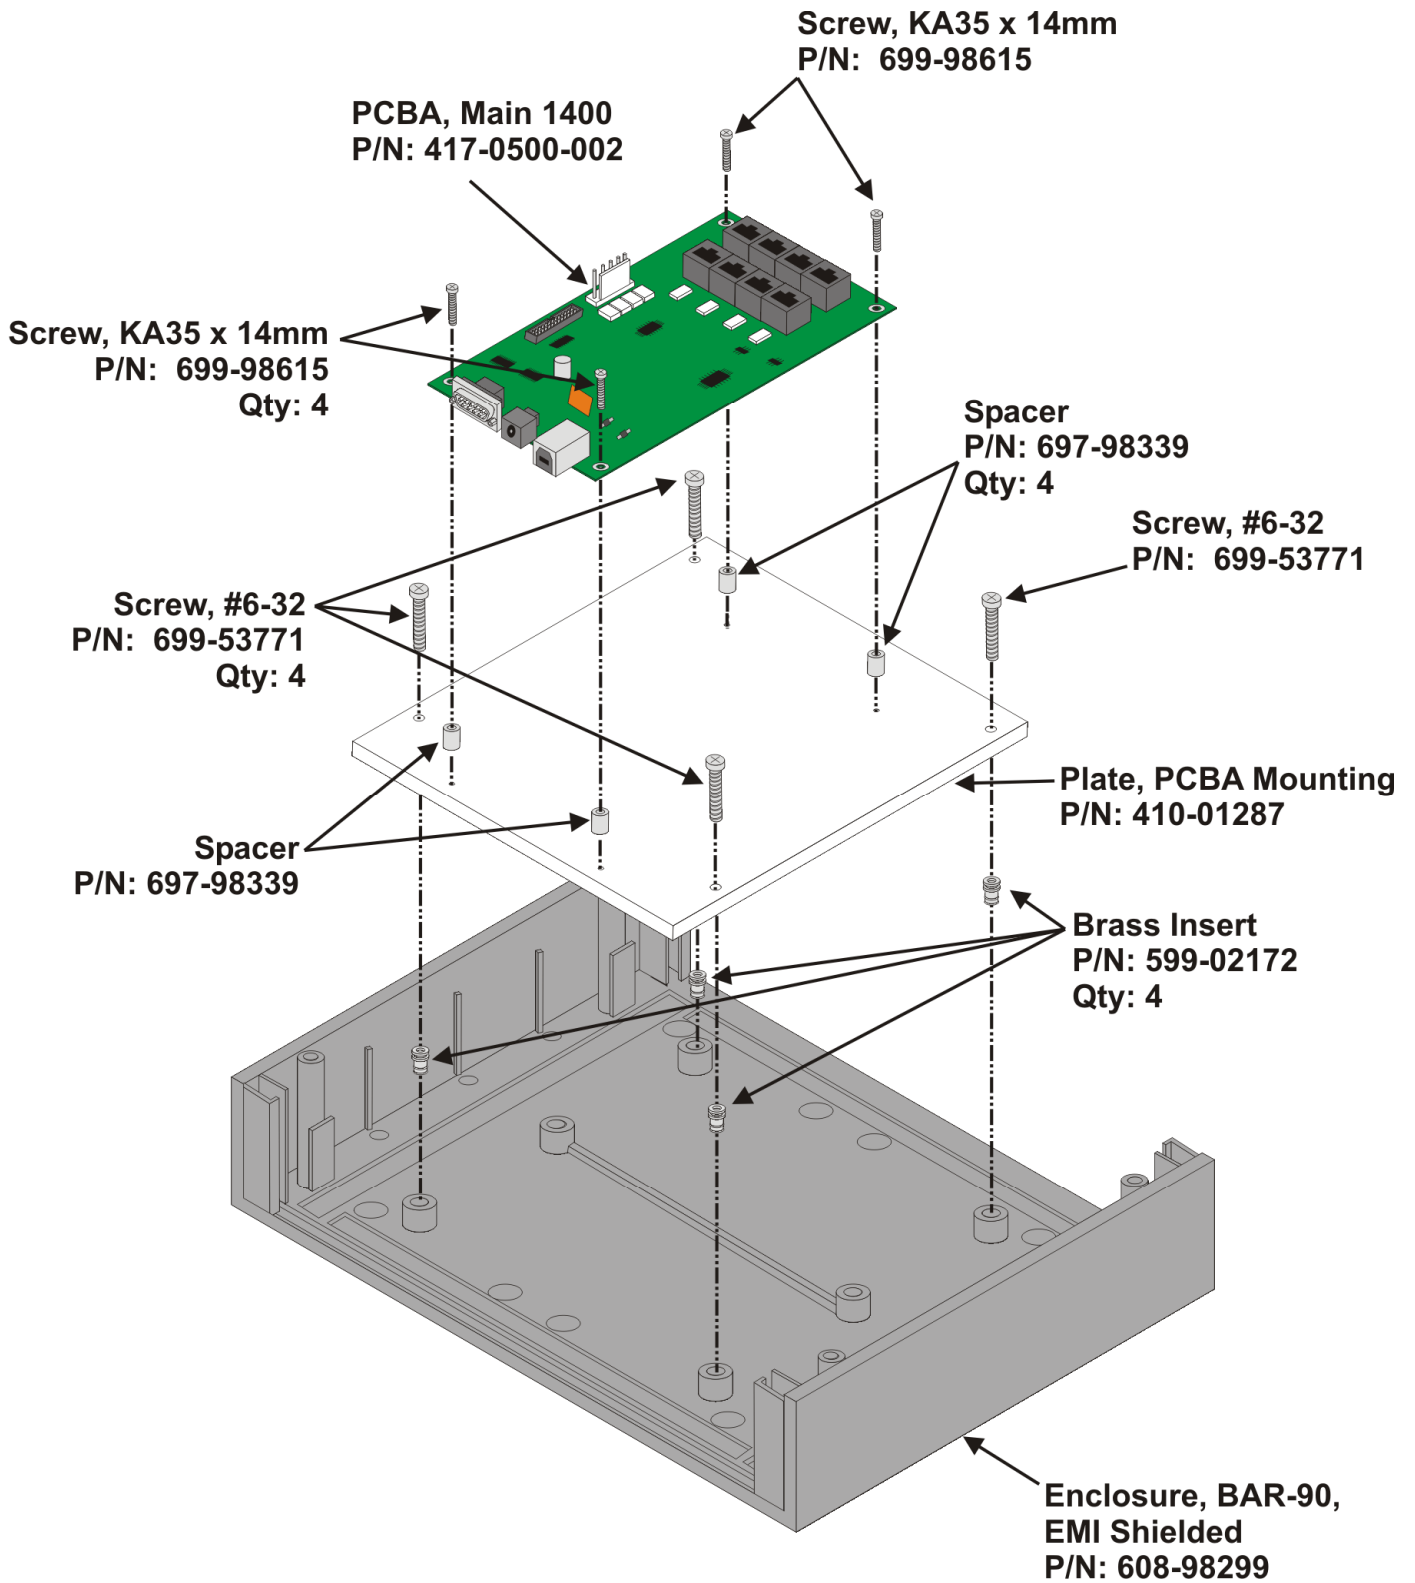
SML Interface Module – Base Cover & PCBA
